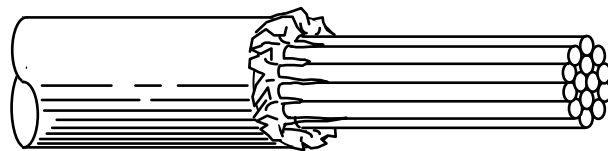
Unacceptable Thermally Stripped, Excess Heat Globular Appearance.
